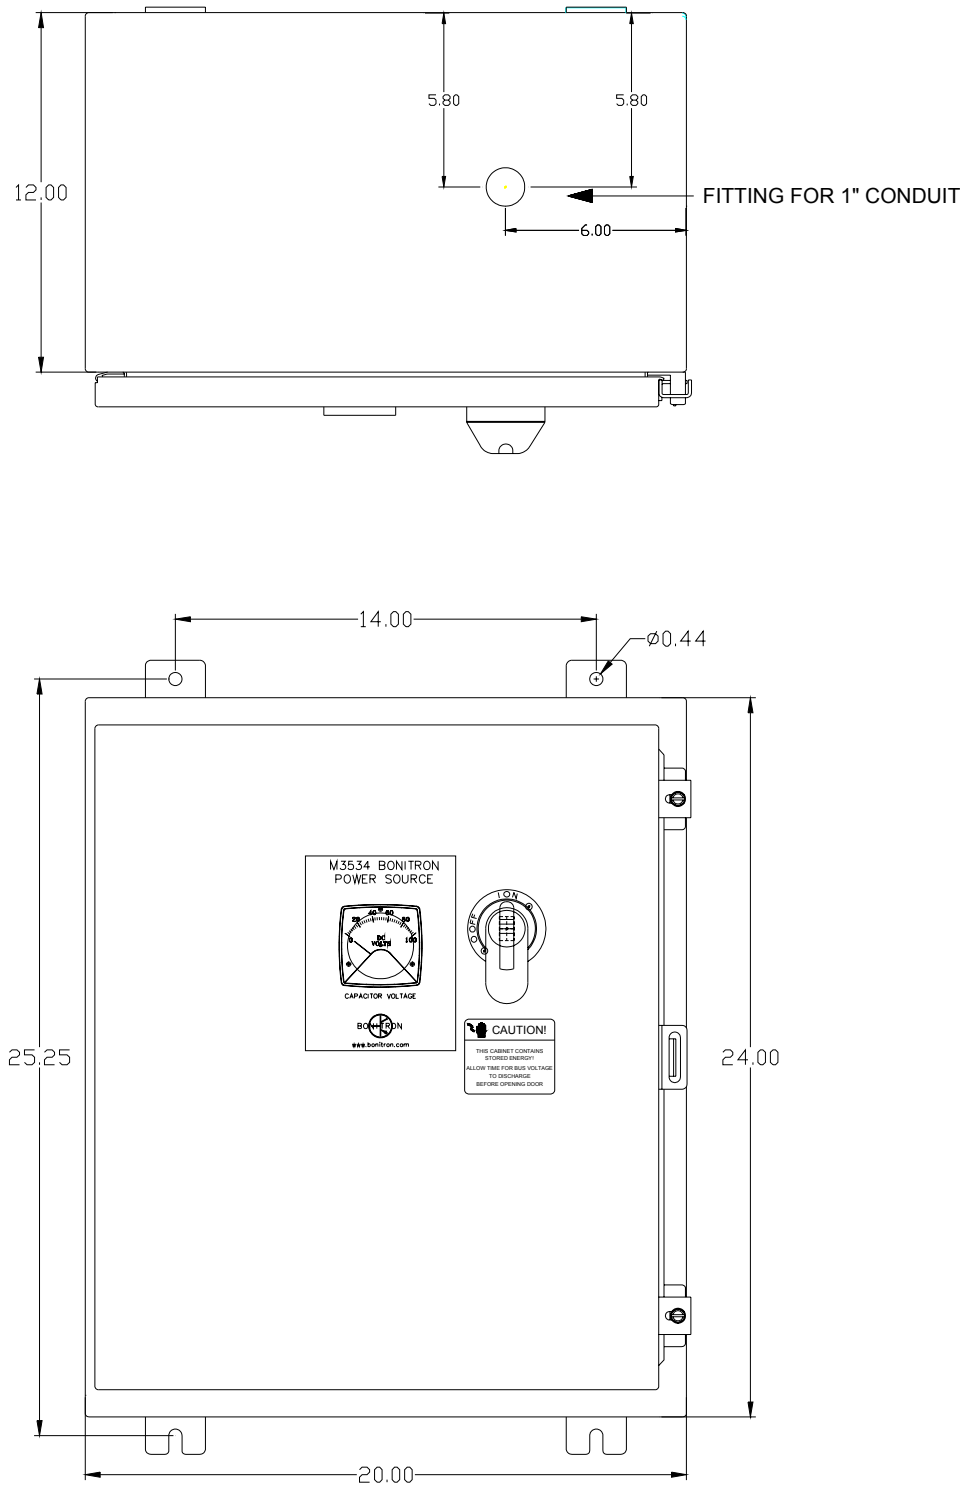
M3534CR 'E63' 4.0 kJ Enclosure Dimensional Outline
